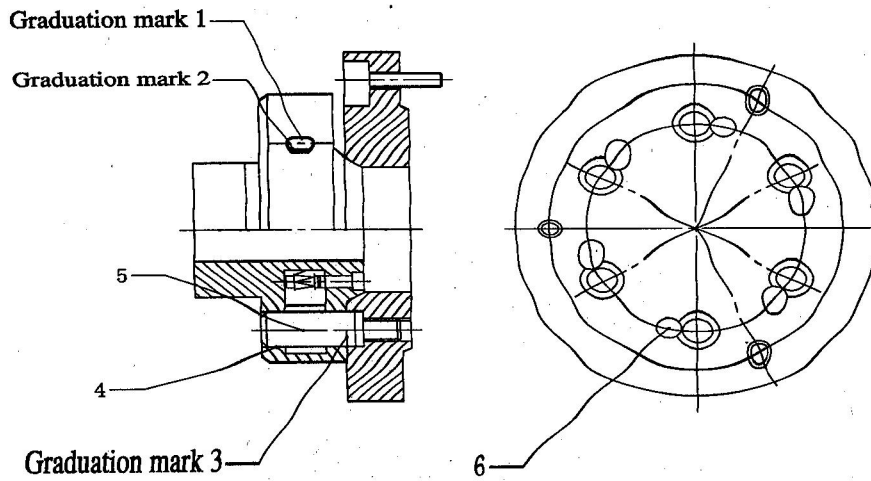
Mounting of chuck or driving plate onto spindle
